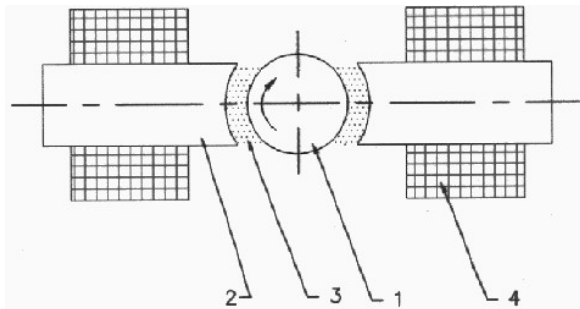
Machining setup developed for semi-magnetic abrasive machining
